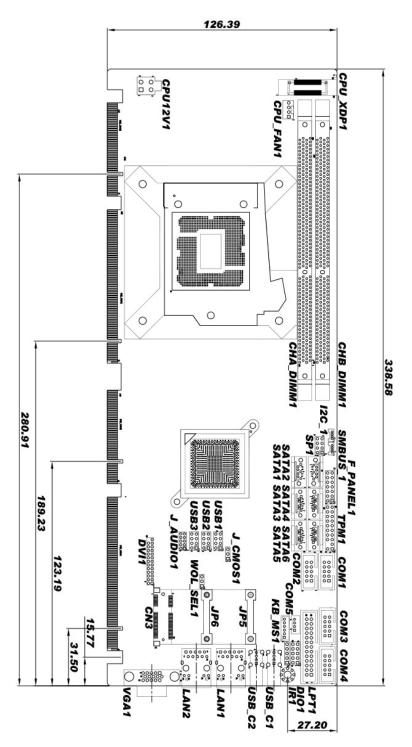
PCIE-Q670 Series Dimensions (mm)
